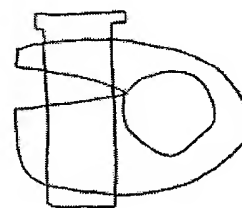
further illustrates the clamp of Walulik *modified* to have tapering inner surfaces, showing a fastener inserted through the bores to close the fastener. As shown, the fastener would only be able to partially close the fastener. Once the inner surfaces near the recess touch, the clamp cannot further move. Secure clamping is thus not provided because the ends of the clamp opposite the recess do not and cannot touch because the fastener prevents any movement of the first and second ends other than parallel to each other.
